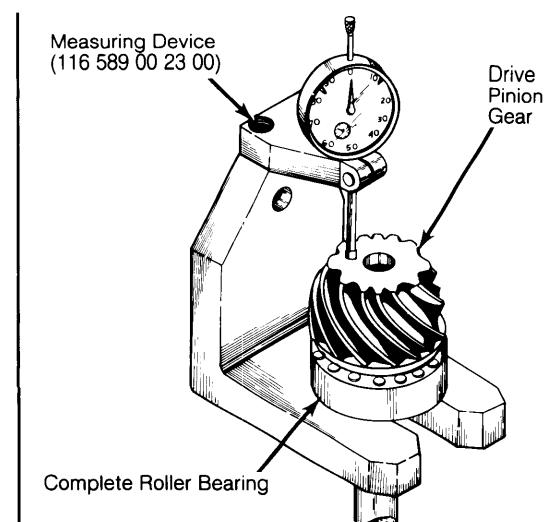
Zeroing Dial Indicator for Pinion Depth Adjustment
